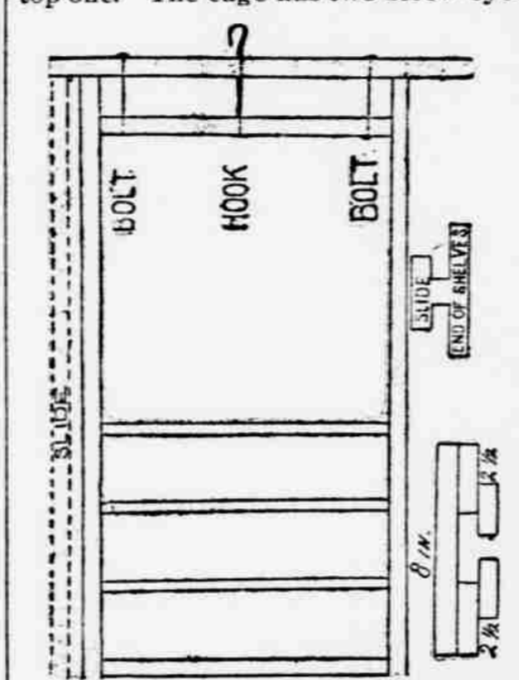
CAGE FOR PUTTING FOOD INTO A WELL.
